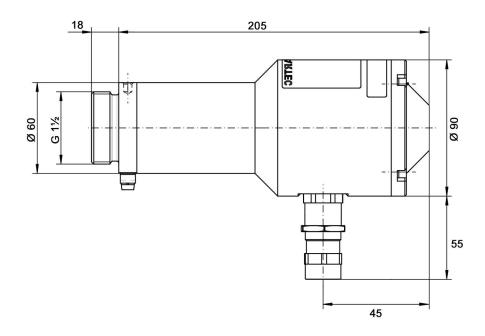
Dimensional drawing compact flame scanner F200K Ex (for Ex zone 1, 21)
